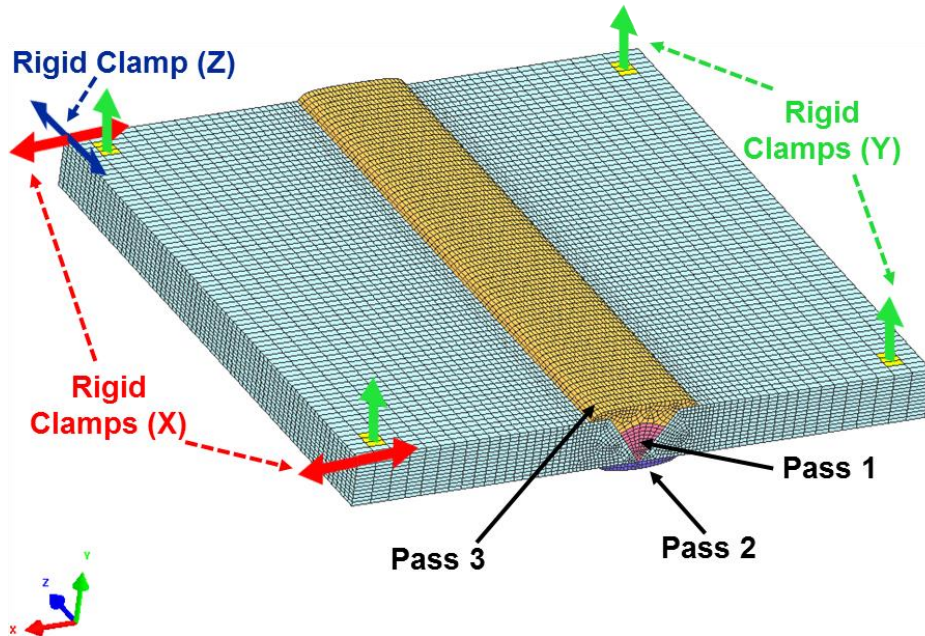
SYSWELD-generated model of an aluminum B2V.1 joint showing the initial mesh and clamping conditions.
